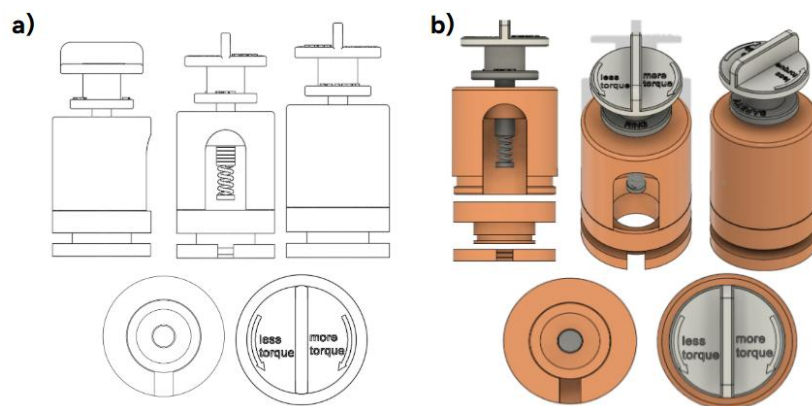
Different views of adjustable spring-loaded optode pressure mechanism designed for cap integration. a) Sketch of the individual components b) 3D design generated in Fusion 360 of the mechanism.
